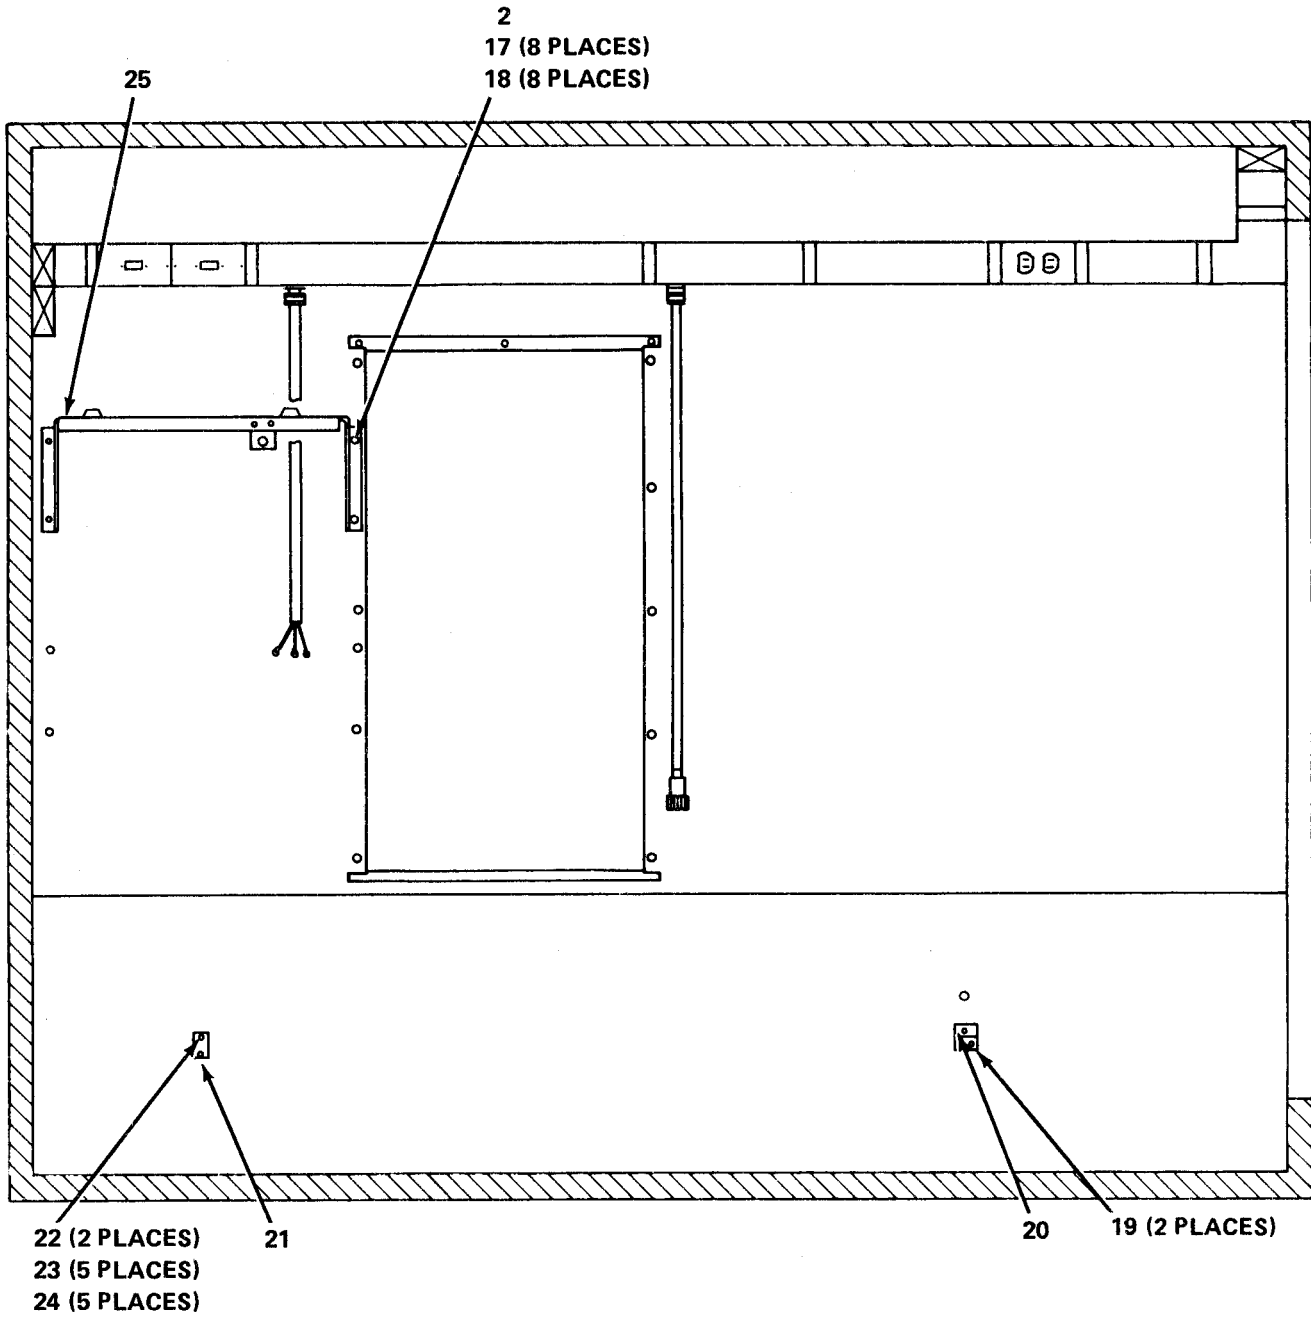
Electrical Equipment Shelter Bracket Installation (Sheet 1 of 5)
